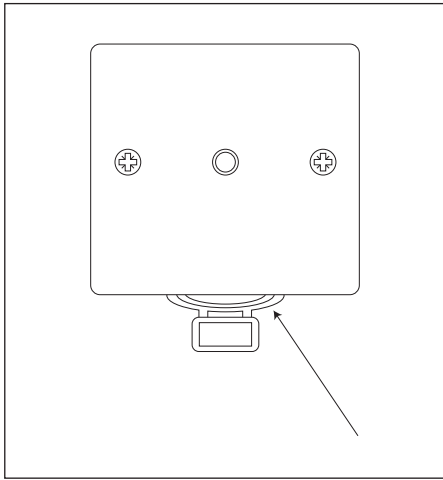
Back Plate, Fixing Screw & Removal Slot
